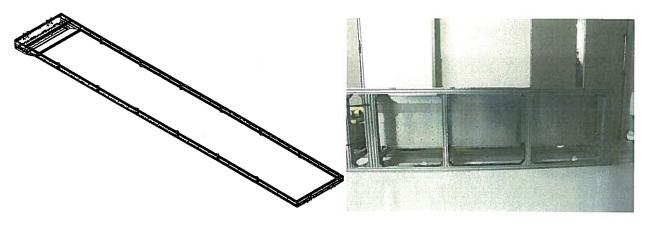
Detailed CAD drawing (left) of the iTOP module currently under construction. This module is mounted into a robust uni-strut type frame (photograph at right) for mechanical support and manipulation/positioning.
